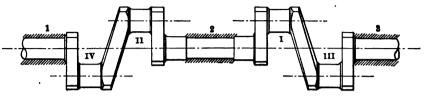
Crank-shaft for a Four-cylinder Marine Engine.
